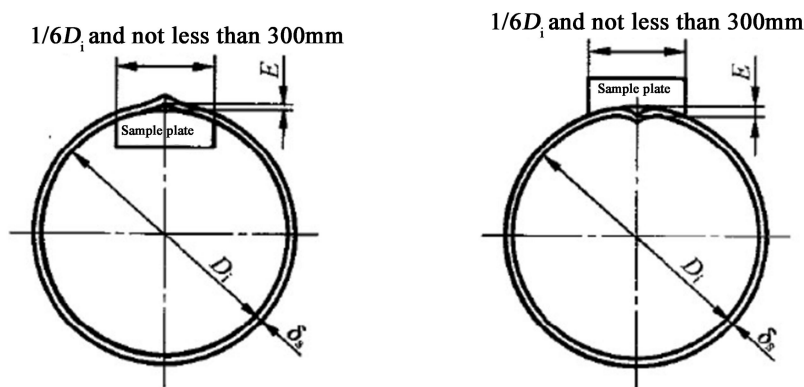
(5) Circumferential Edge at Weld Joint
